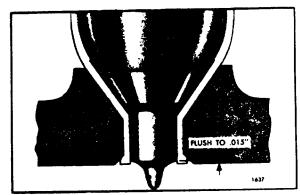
Checking Location of Injector Spray Tip Relative to Lower Surface of Cylinder Head
